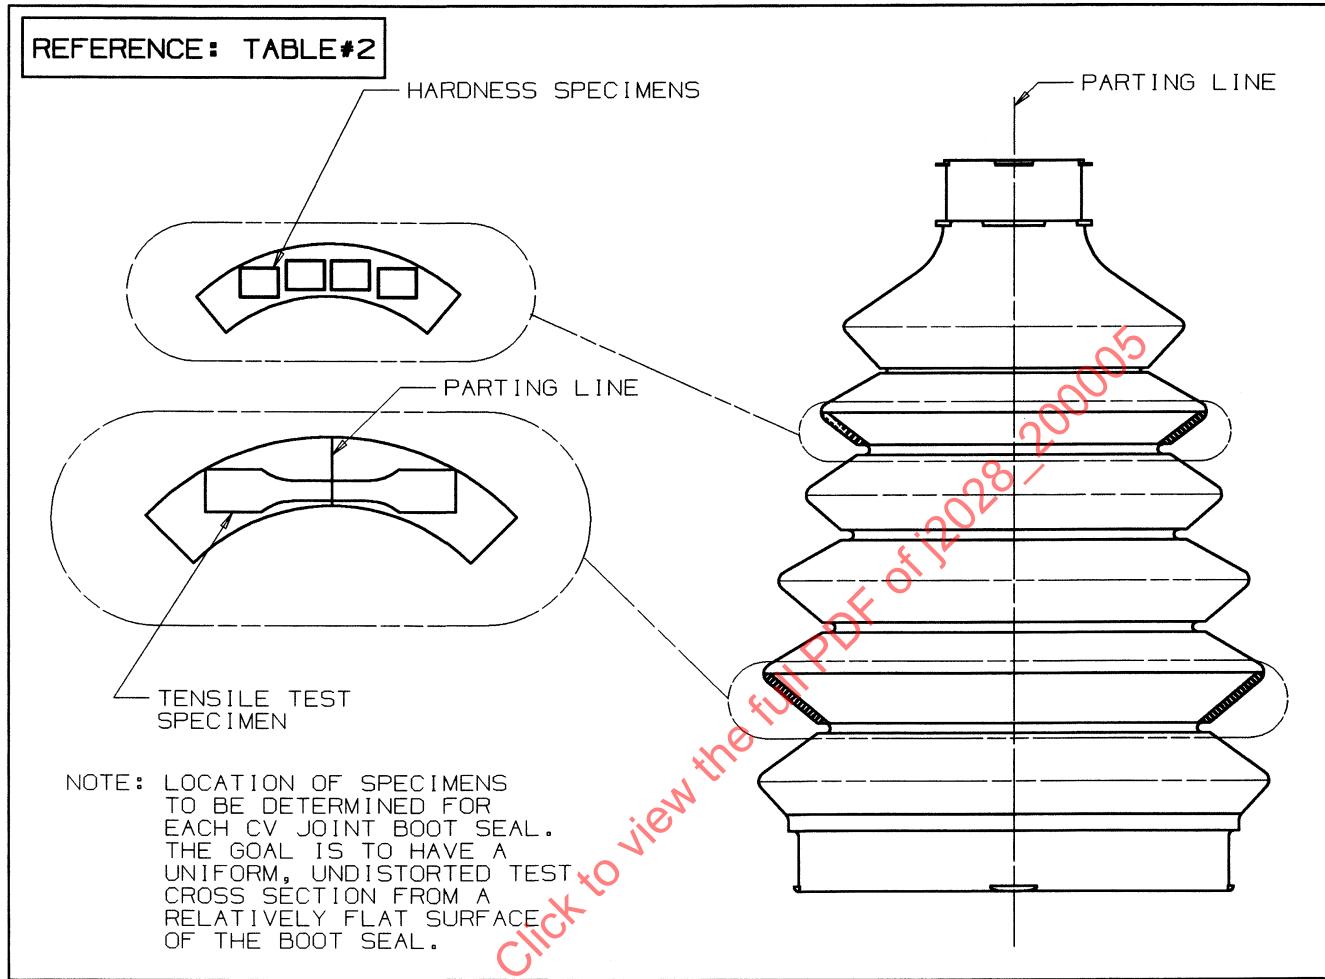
TYPICAL AS MOLDED—TPE BOOT SEAL
